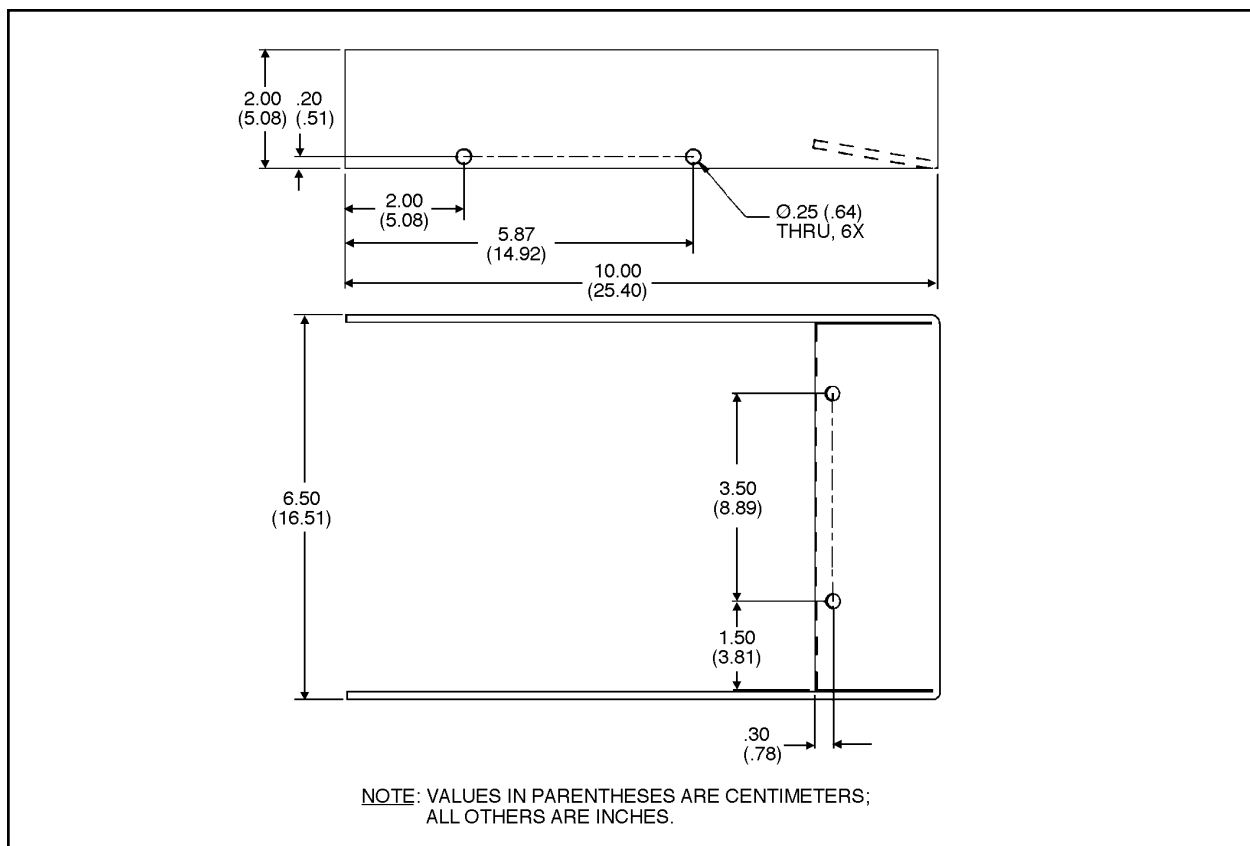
HS8000CA Ceiling Adapter Plate Dimension Drawing
